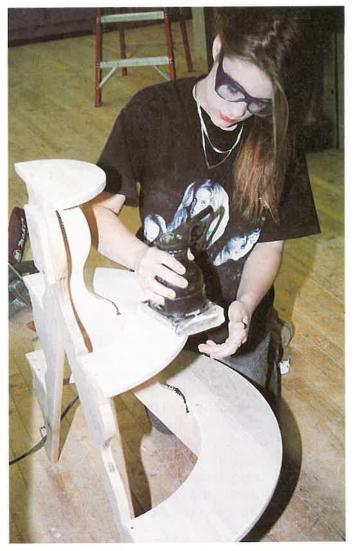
Abrasives are used to smooth workpieces before finishing. (Montachusett Regional Vo-Tech School, Fitchburg, MA)
